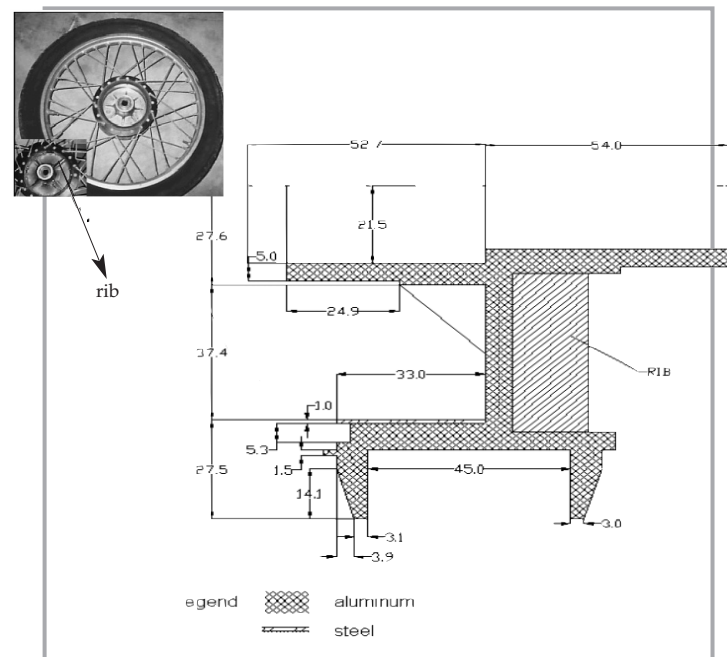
Motorcycle drum brake and its cross-sectional area (dimension in mm)
